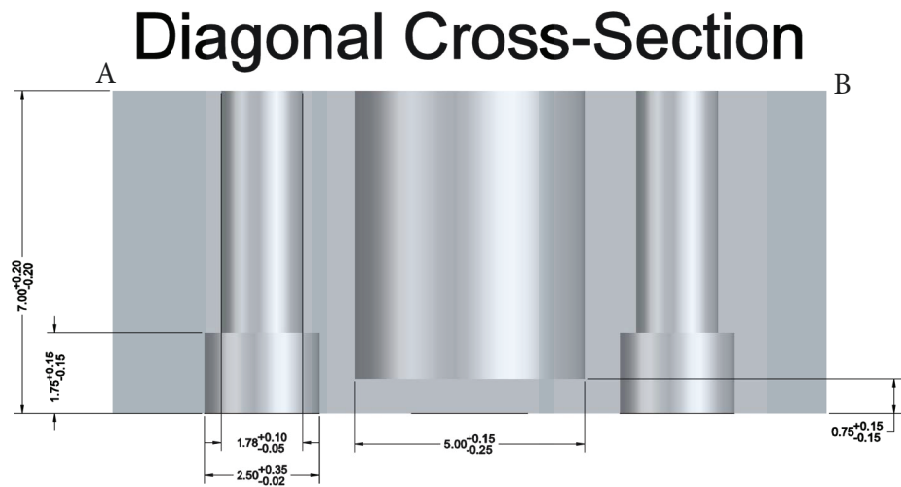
Cross-sectional view of glycerol cup. Points A and B refer to corresponding locations in Fig. B.2
